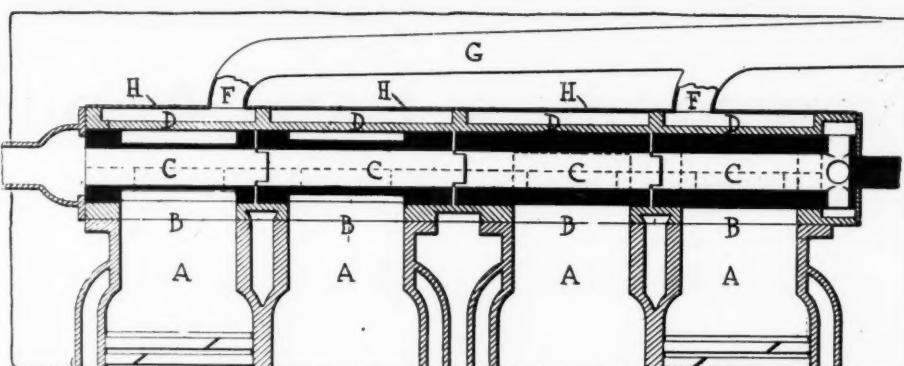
Longitudinal section through Bournonville motor, showing valve in four parts
